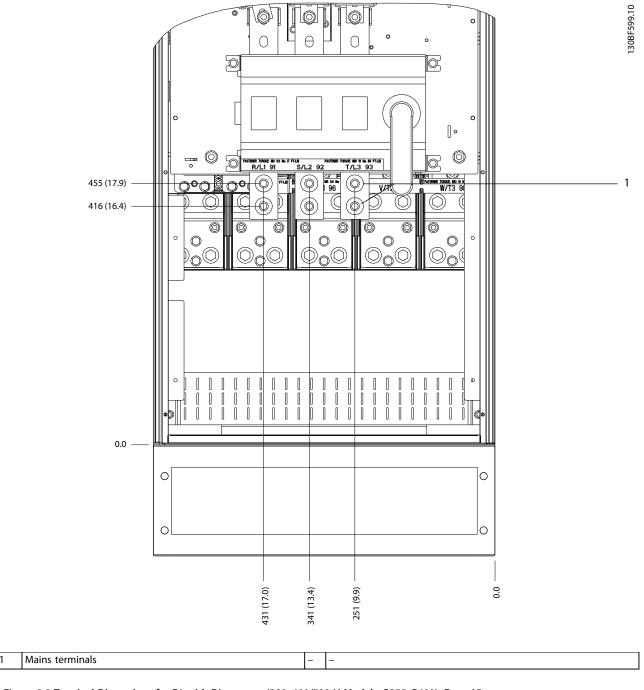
Terminal Dimensions for E1 with Disconnect (380–480/500 V Models: P355–P400), Front View
